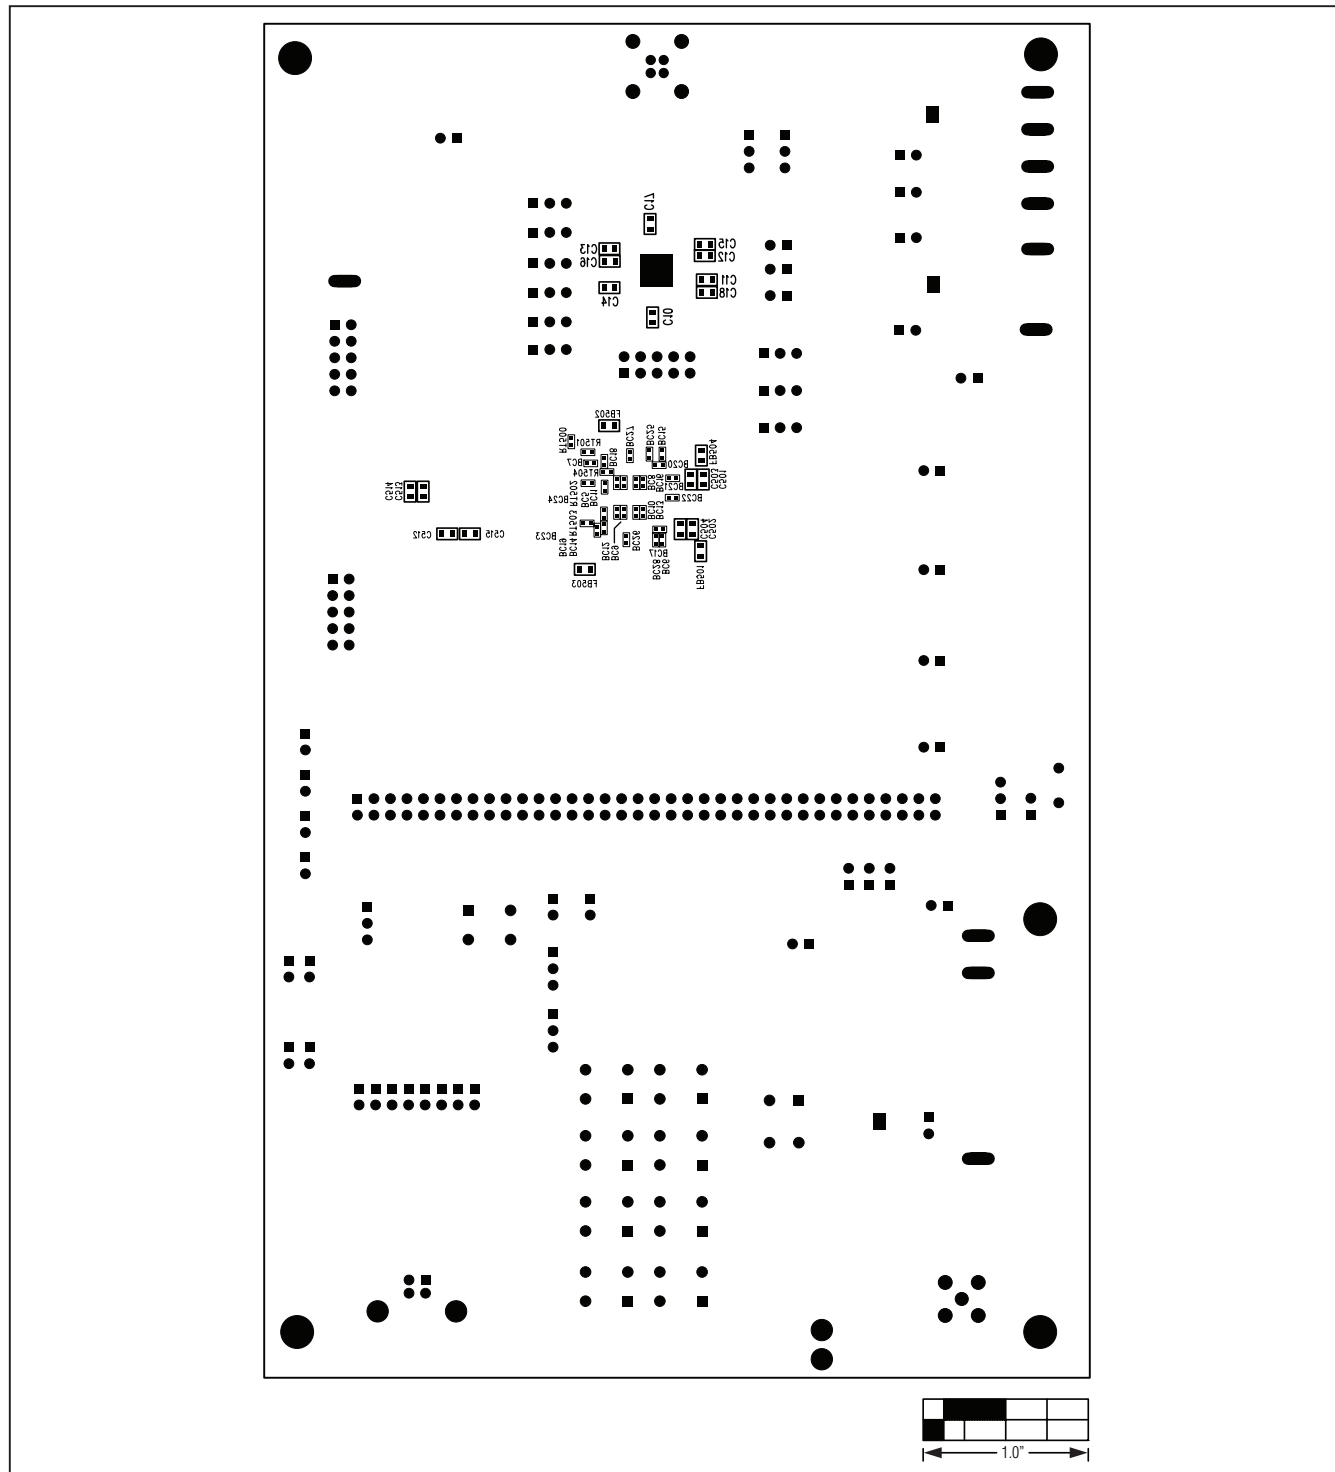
MAX9249 EV Kit Component Placement Guide—Solder Side
